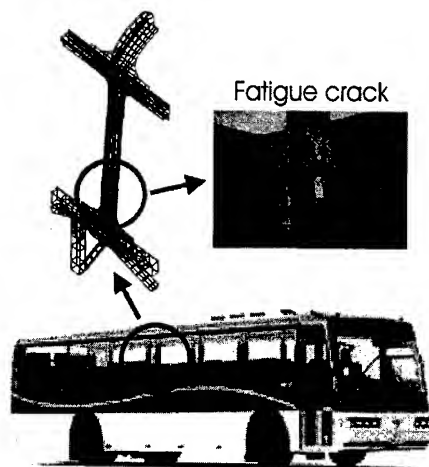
The shape of bus window pillar member and typical fatigue crack
